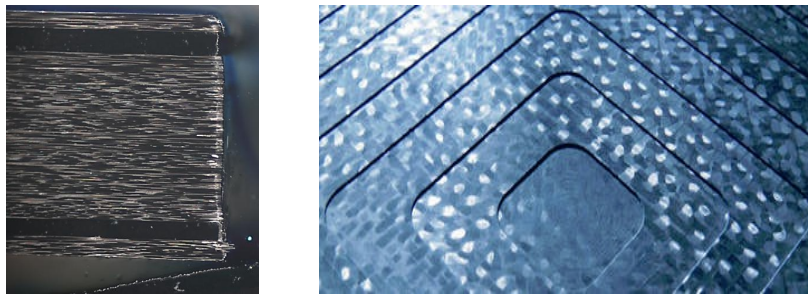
Photographs of CFRP parts processed with a 3 kW fiber laser: multi-pass cutting of a 2 mm sheet (left), and preparation of a part for patching (right) showing selective material removal.
